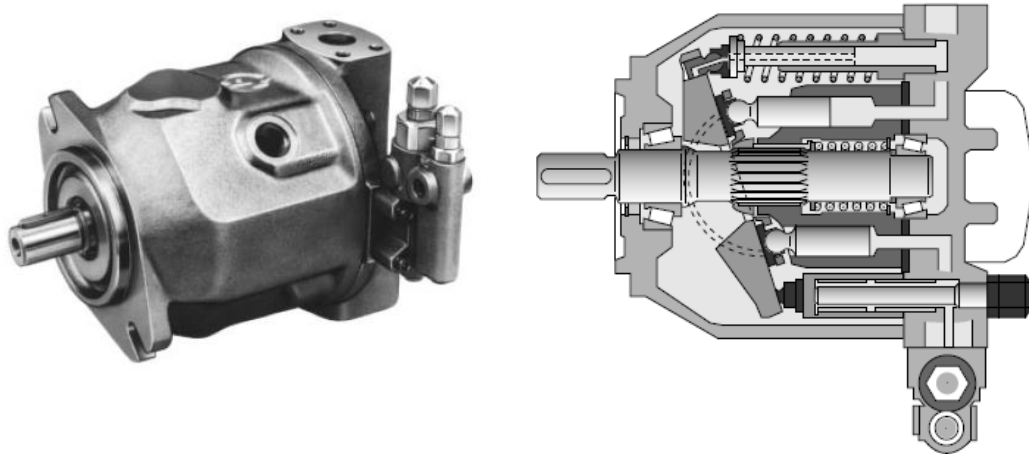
Axial piston pump (Bosch Rexroth AG Hydraulics 2004).
